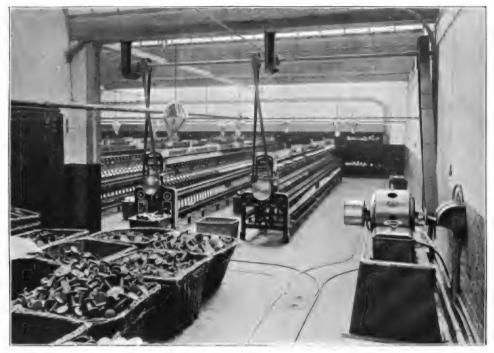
Three-phase Motor Driving 6 Quick-traverse Winding Frames, 670 Spindles and 6 Patent Doubler Winding Frames with 750 Bobbins.
